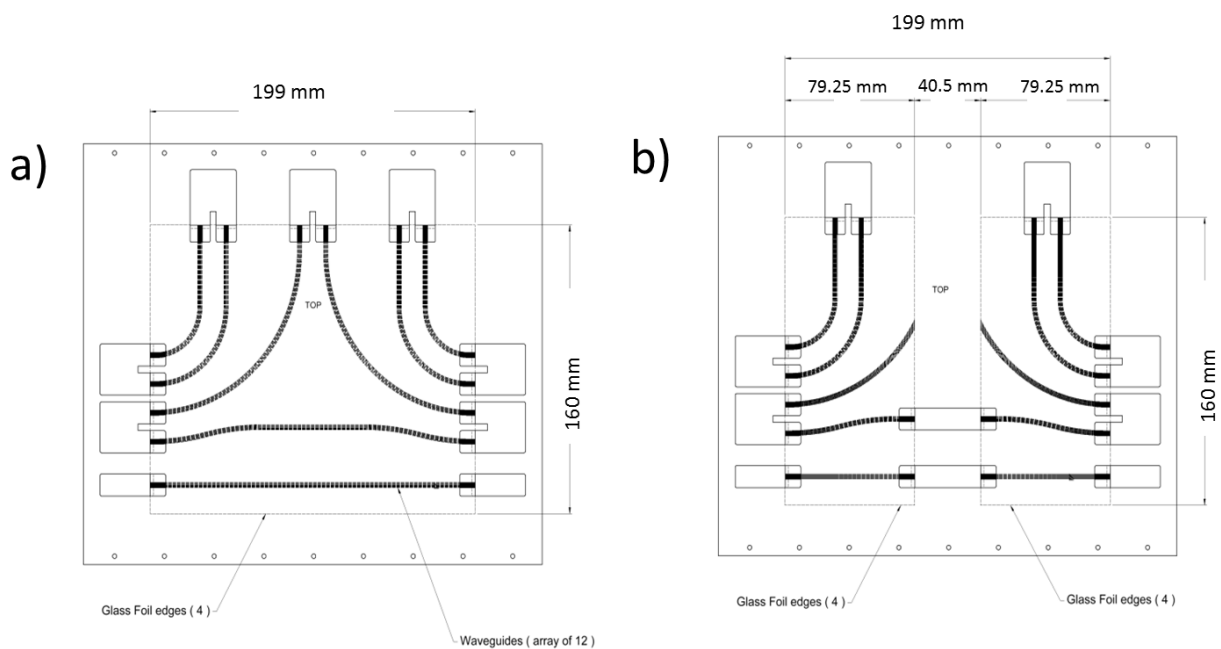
a) SEPPLANE 1 glass panel dimensions, b) SEPPLANE2 glass panel and gap dimensions
